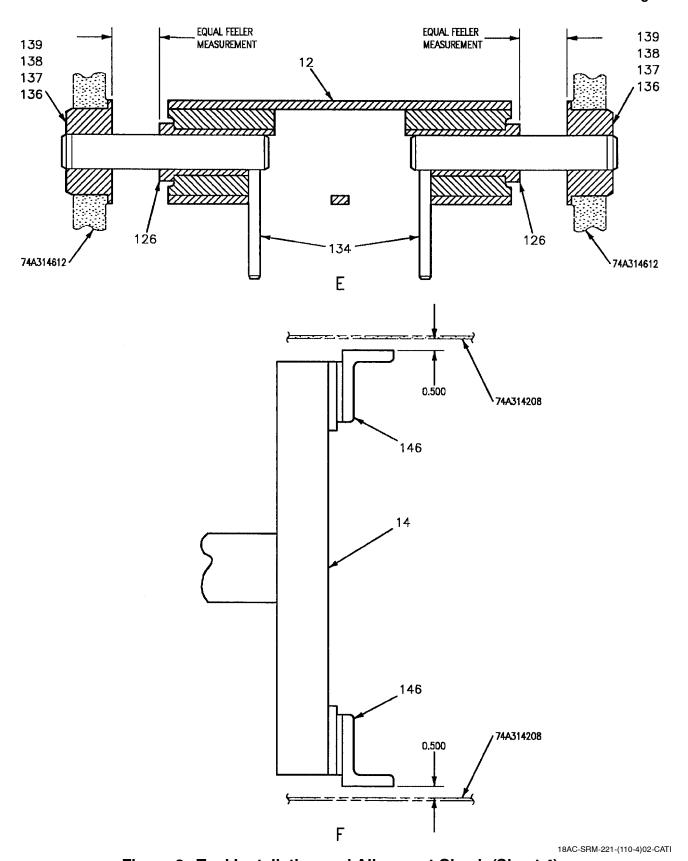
Tool Installation and Alignment Check (Sheet 4)
